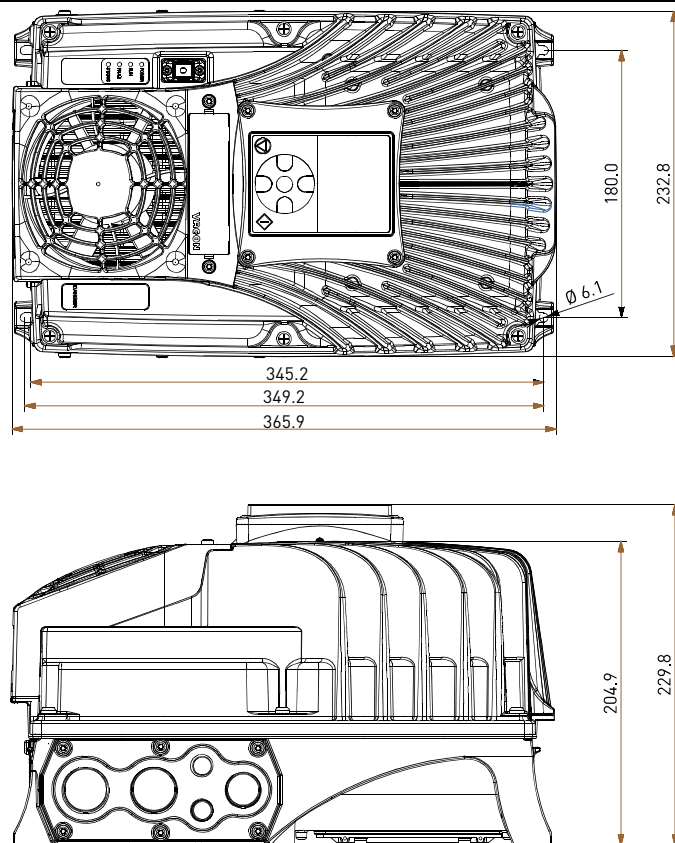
Vacon Motor Mountable drive dimensions, MM5
